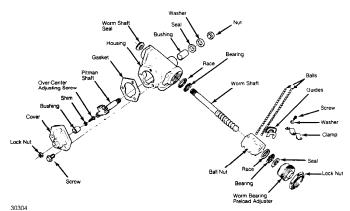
Exploded View of Saginaw Model 525 Steering Gear (Typical)
